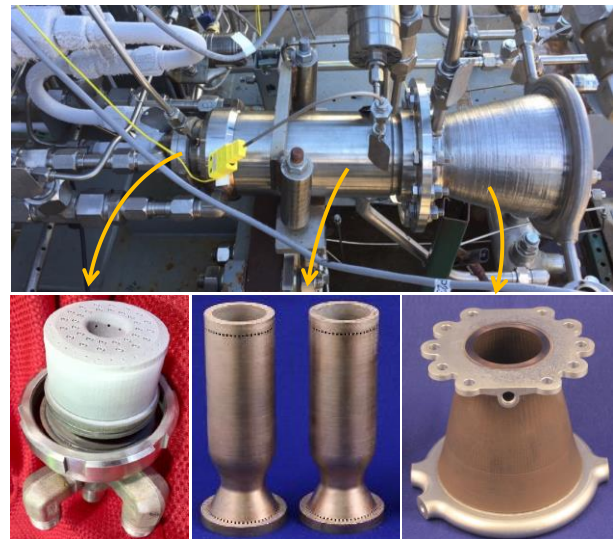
Thrust Chamber Assembly for LWDC and DED subscale testing. The bottom shows the AM coaxial injector, GRCop-84 liners, and DED nozzle.
